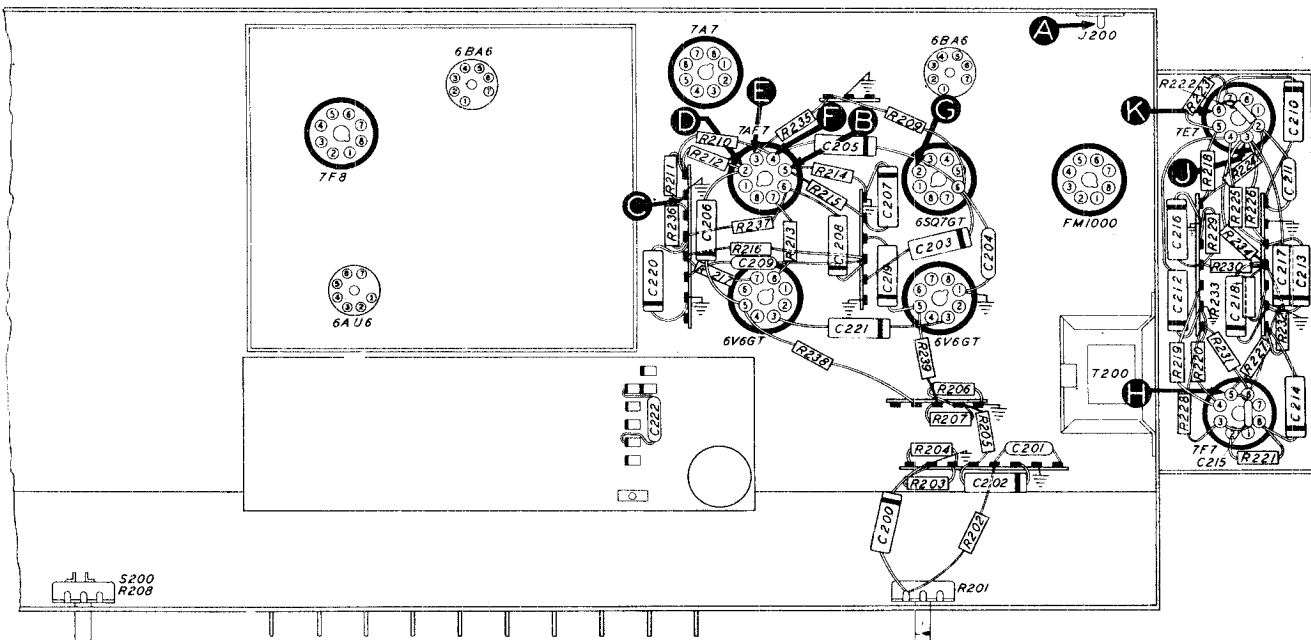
Bottom View Showing Section 2 Test Points (location of R200 shown in figure 8)
